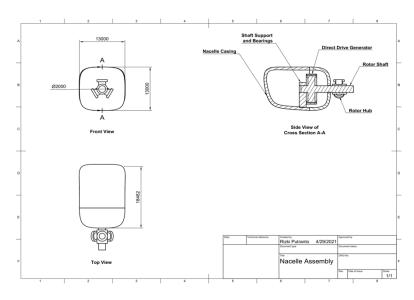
2D NACELLE CAD TECHNICAL DRAWING
